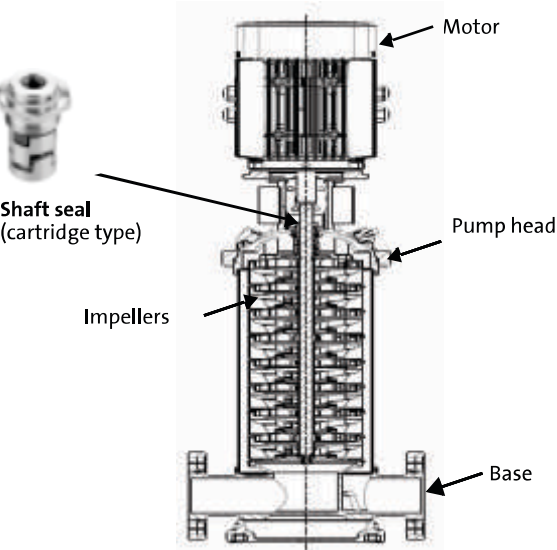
Shaft seal in a SCR pump (in-line pump)
